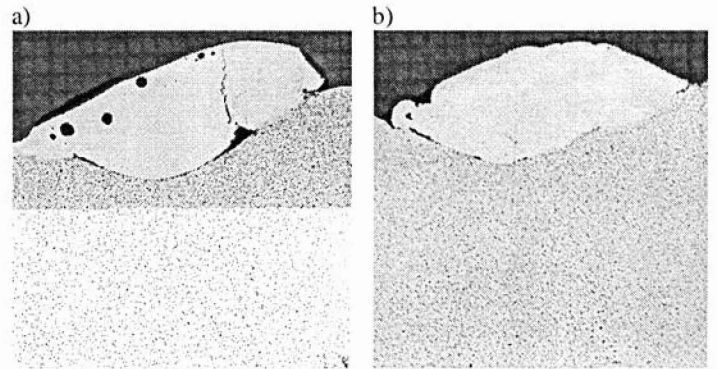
Macrostructure of padding weld after surfacing by welding TIG of nodular cast iron EN-GJS-500-7: a - on cold (without preheating), b – on hot-cold (preheating temperature 300°C)
